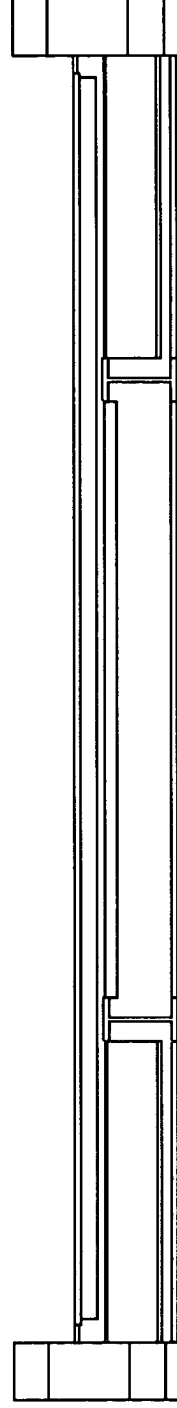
A: Left view of a floor frame (40 foot collapsible cargo container)
